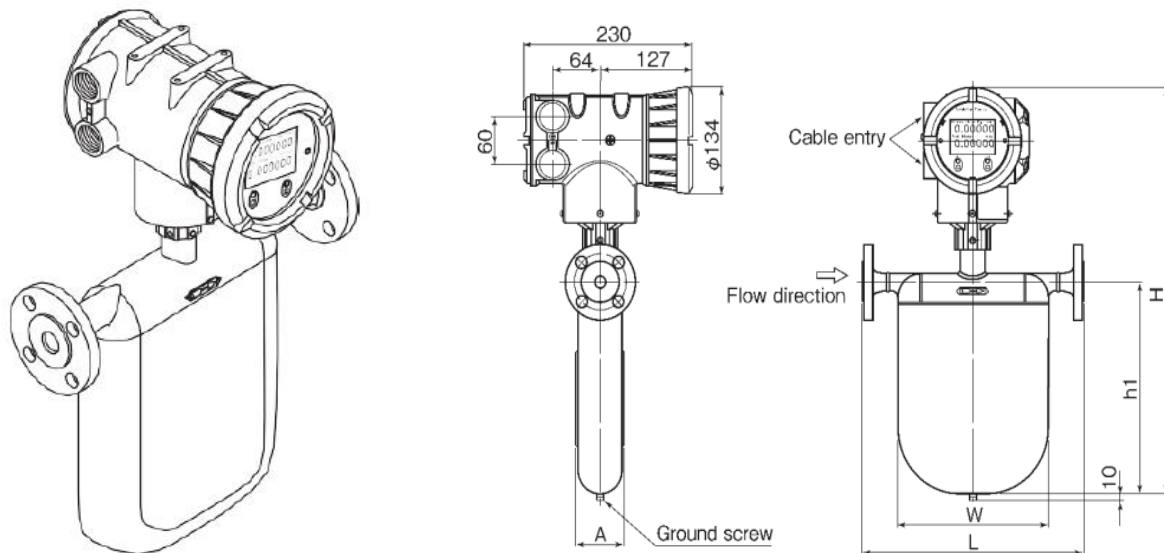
Schematic views with outline dimensions of a L-Cor 8000 integrally mounted model (for example).
